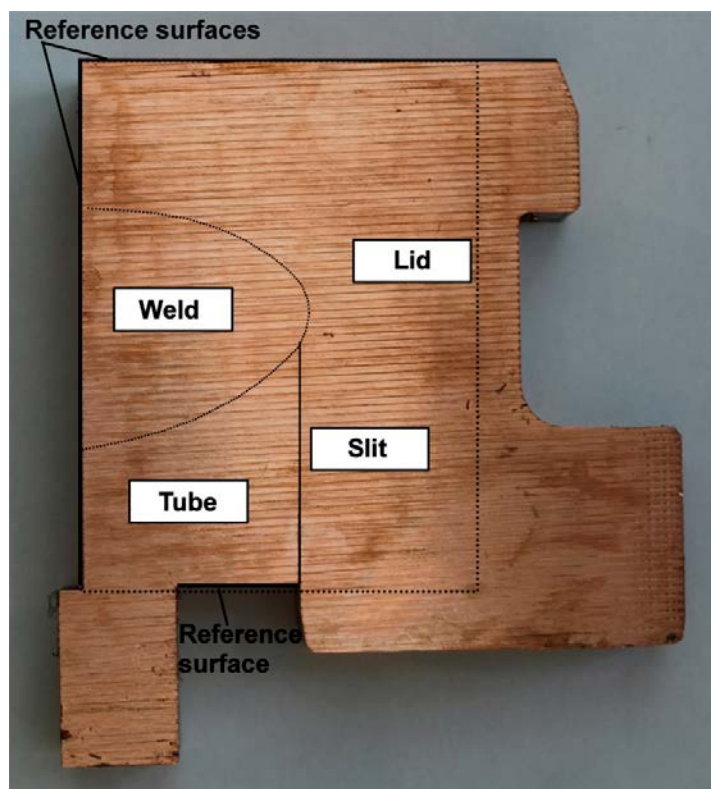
Cross-section of a welded roughly cut canister. Rectangular specimens indicated with dashed straight lines were cut from the segments for further investigations. The weld zone of interest is also indicated in the figure.
